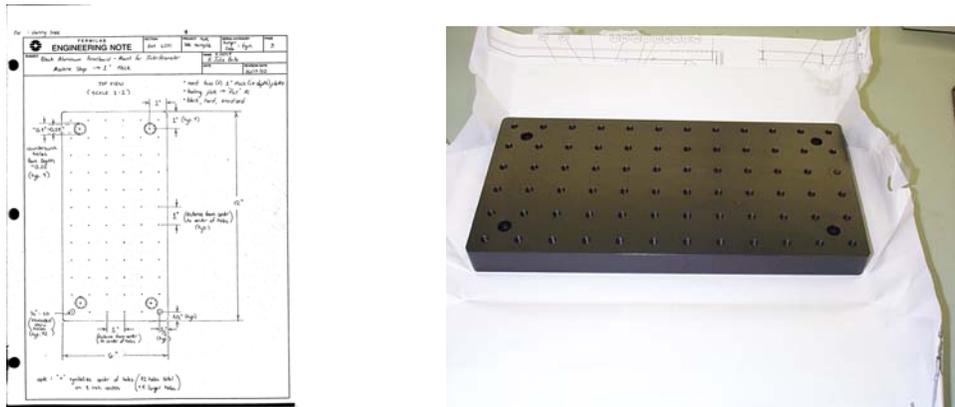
Left: Sketch of platform with measurements. Right: Finished platform.
